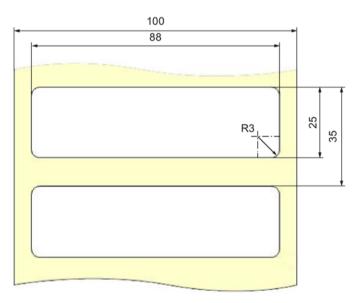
Dimension drawing RF690L (ETSI, article number: 6GT2810-2AG00)
